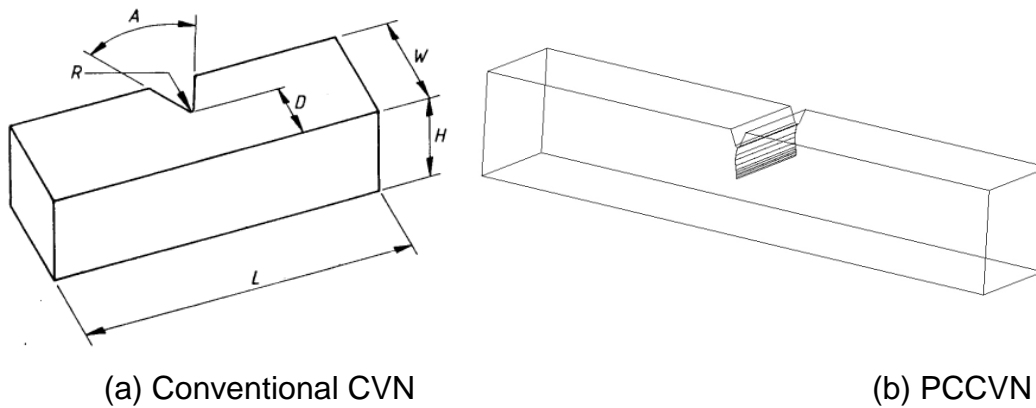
Drawing showing geometry of Charpy V-notch and PCCVN sample
